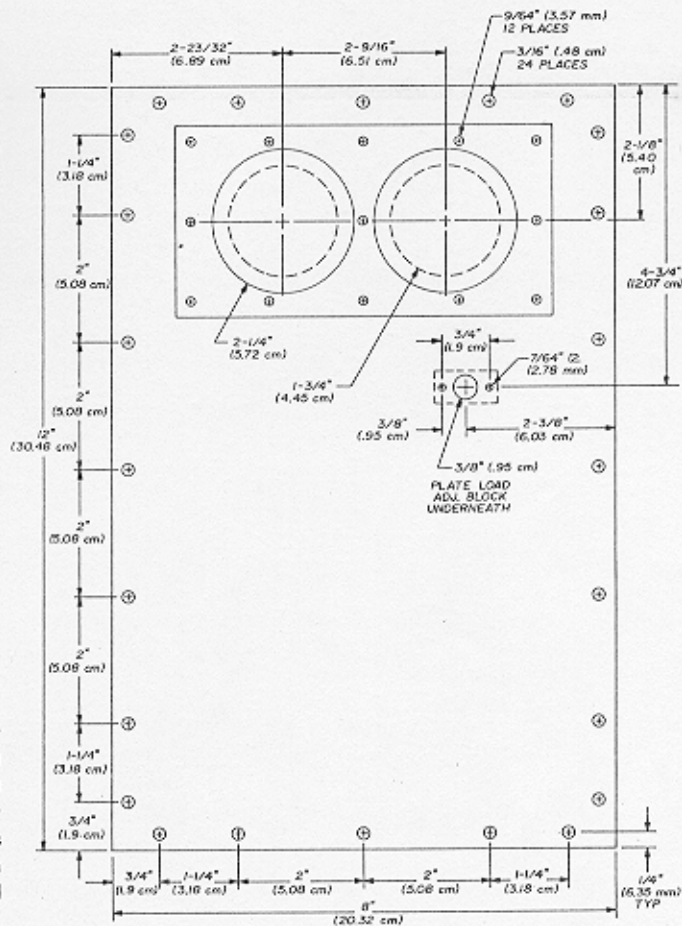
Bottom view of the top plate of the two-meter kilowatt. Top plate is made from 3/32-inch (2.5mm) aluminum sheet; vent plate is made from 3/16-inch (4.5mm) thick aluminum. The dashed 1-3/4-inch (4.5cm) circle is for 4CX250R and similar tubes; the 2-1/4-inch (5.7cm) circle is for the recommended 8930 tubes. A piece of aluminum screen is cut to the same dimensions as the vent plate and mounted between the top plate and the vent plate.
